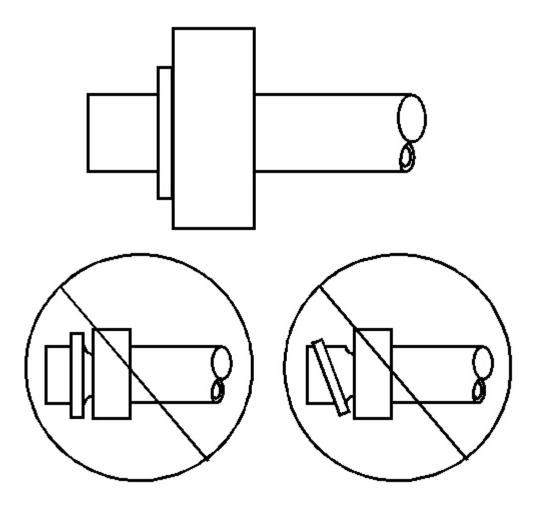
Identifying Good And Bad Sealing Washer Positions Courtesy of GENERAL MOTORS CORP.
